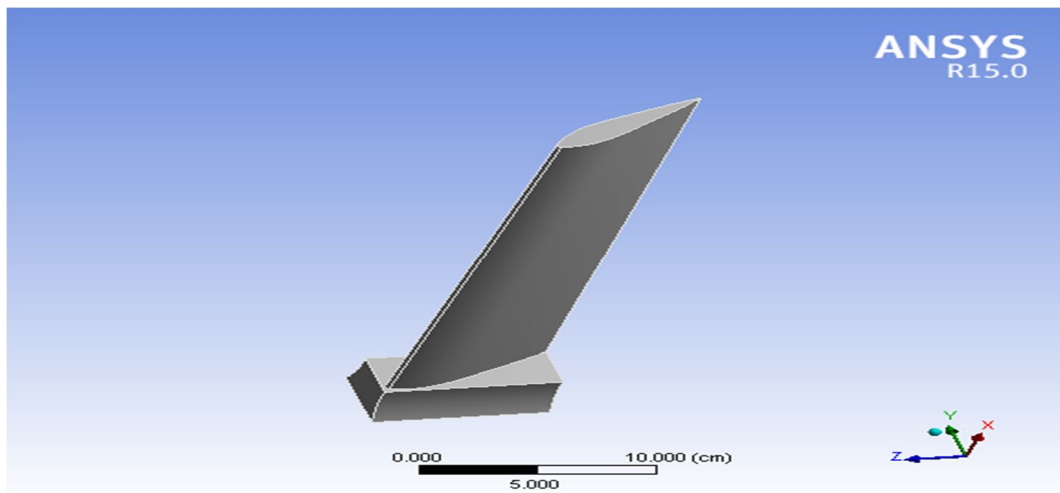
CAD Model of Compressor blade with  $16.5^{\circ}$  angle
